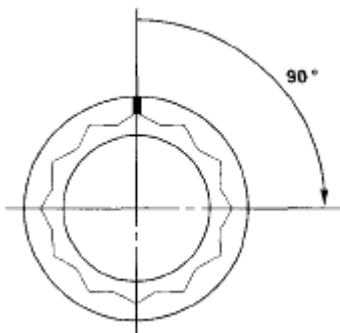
Identifying Connecting Rod Bolt Position Angle
